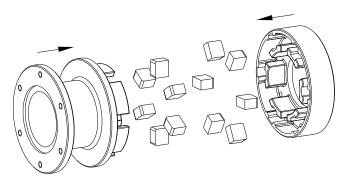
Assembly of driving flange, spacer and elastomer sets
